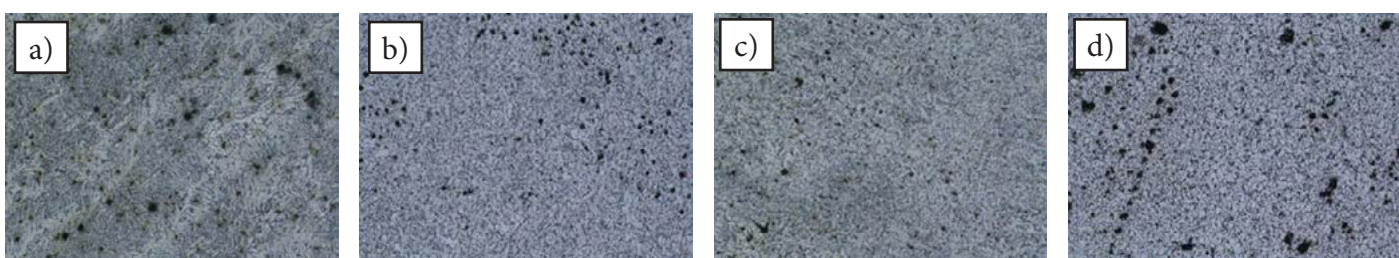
Macrostructures of the welds areas in the butt joints: BW1 (a), BW2 (b), BW3 (c) and BW4 (d)
